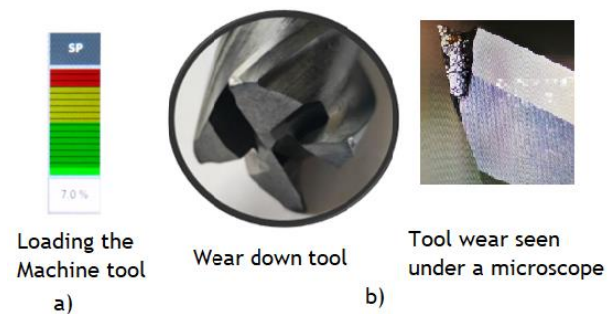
Loading the Machine tool end Wear down tool (strategy Classic).
